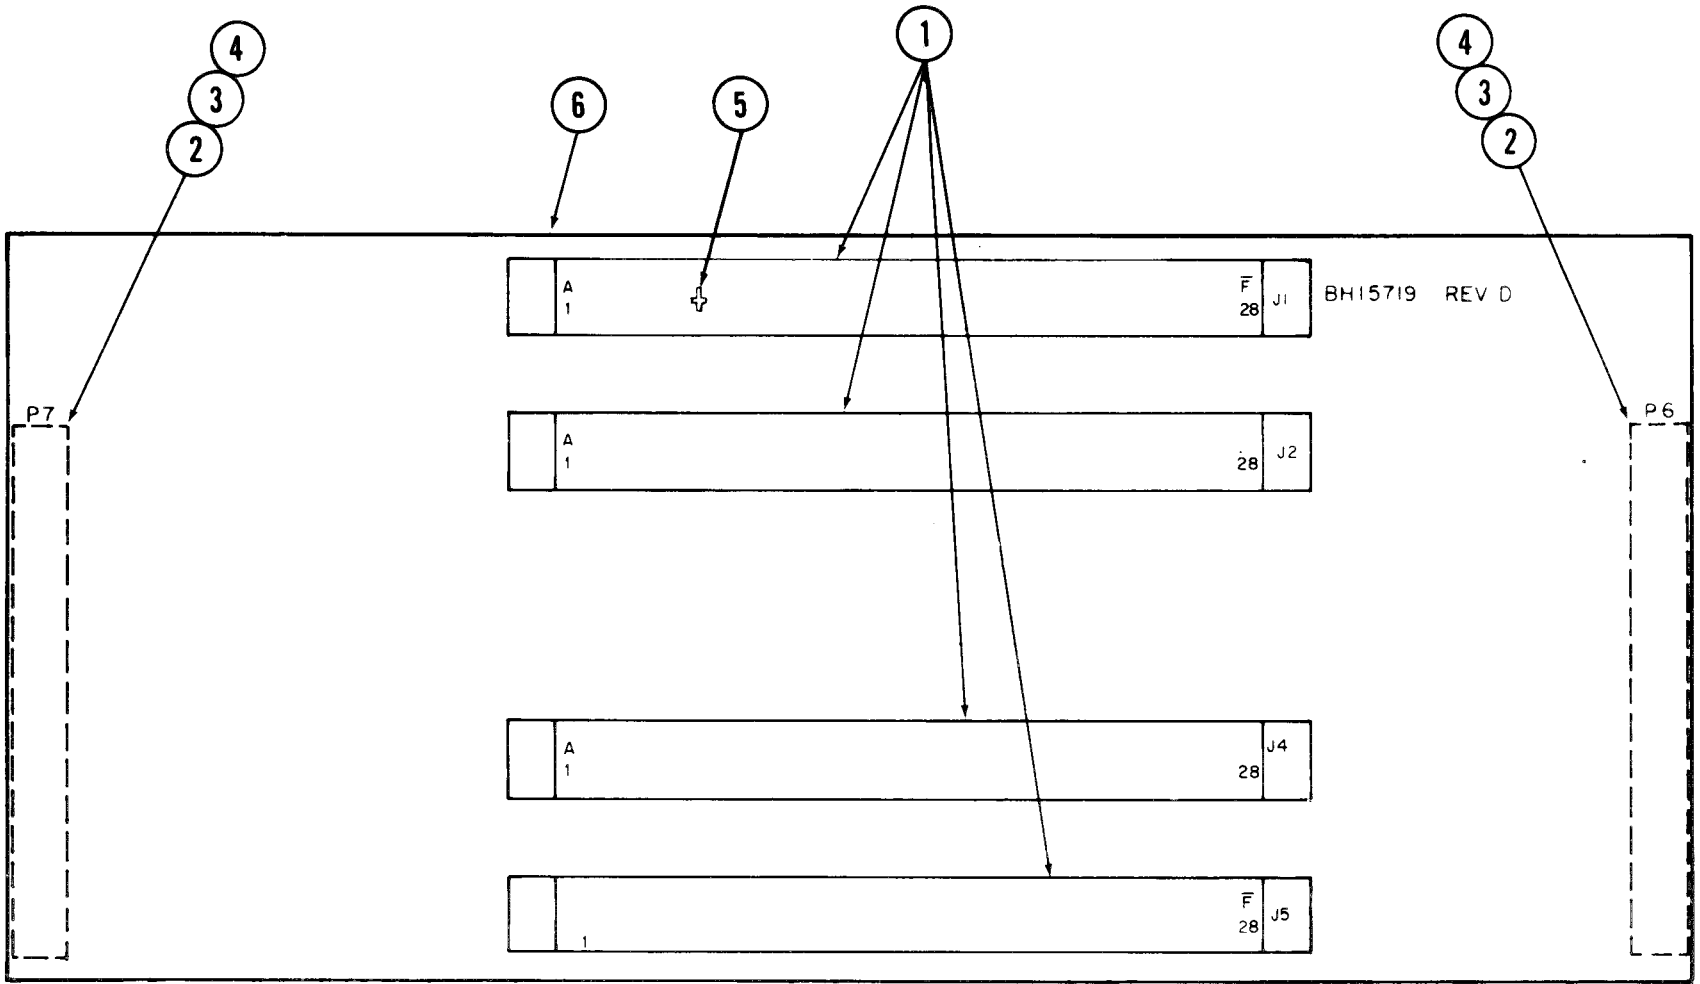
BH15719-2 Mother Circuit Board Assembly.
